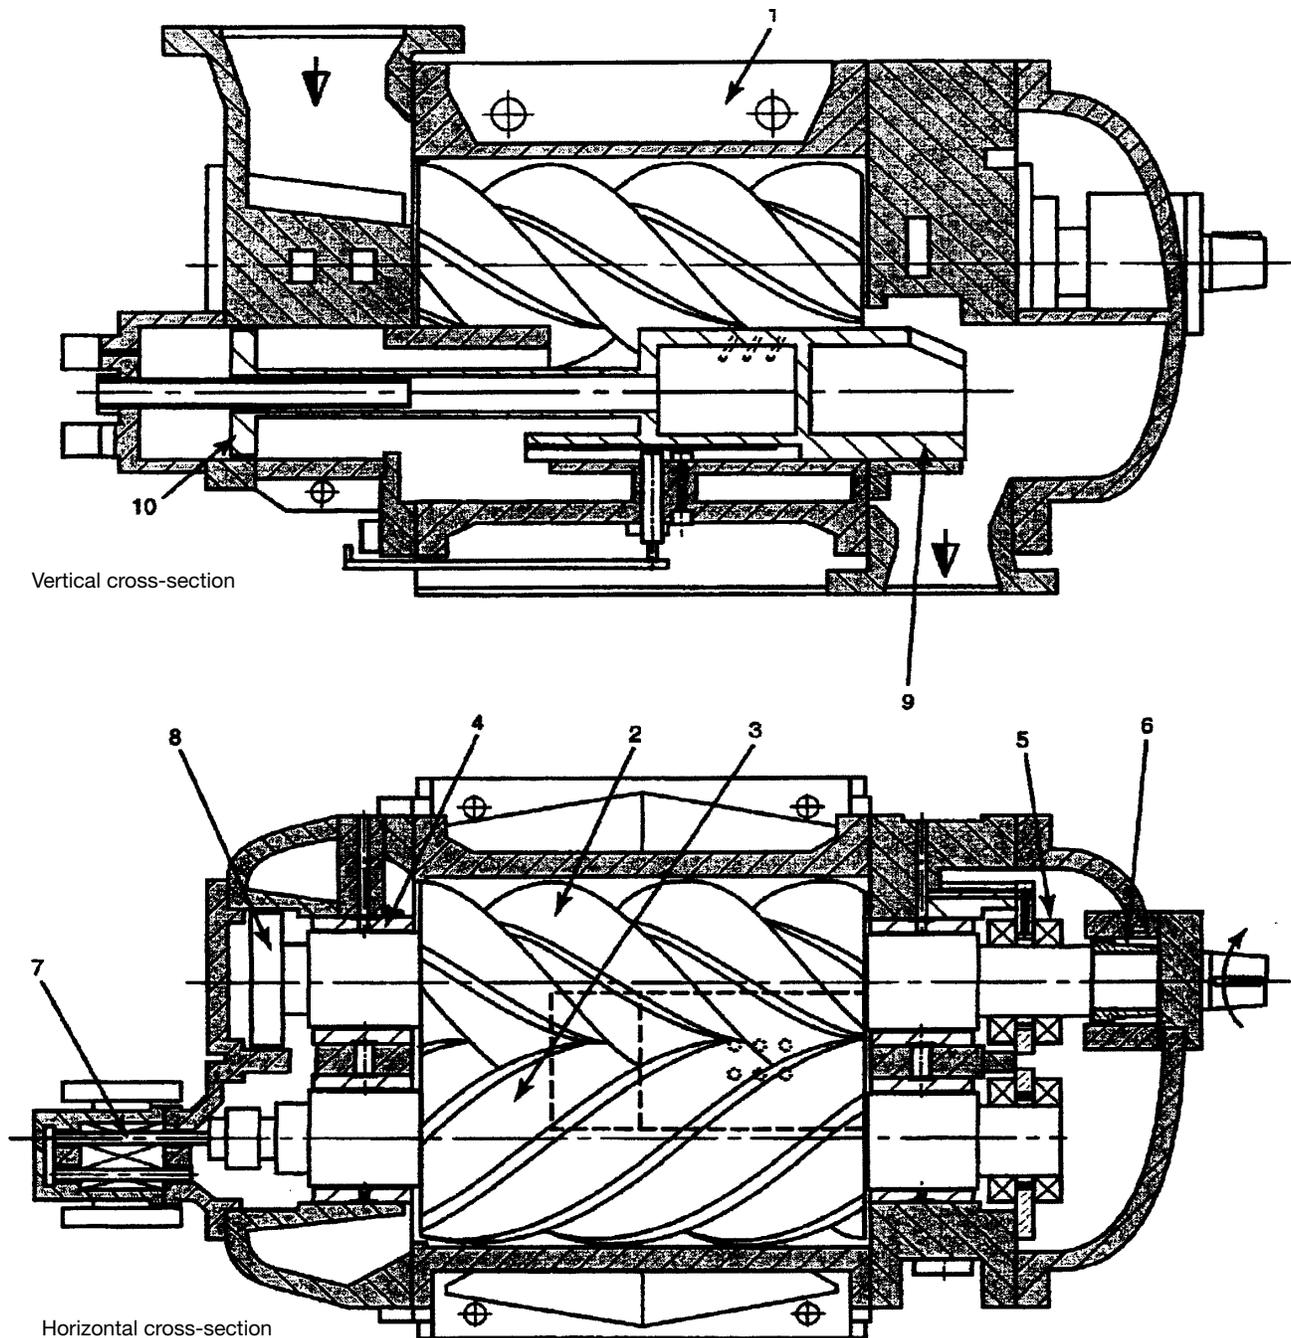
Cross-sectional views of liquid-injected screw compressor, per API 619. Major components: 1. housing, 2. male rotor, 3. female rotor, 4. radial bearings, 5. axial bearings, 6. mechanical seal, 7. oil pump, 8. hydraulic thrust compensating piston, 9. capacity control slide valve, 10. double acting hydraulic piston.
